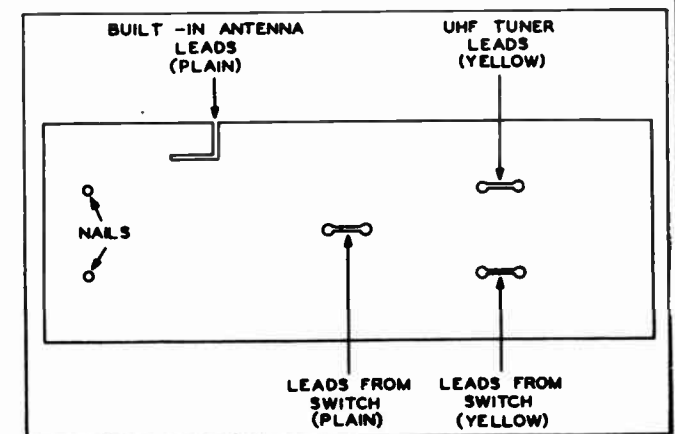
Rear View of VHF Tuner, Showing Lead Dress
